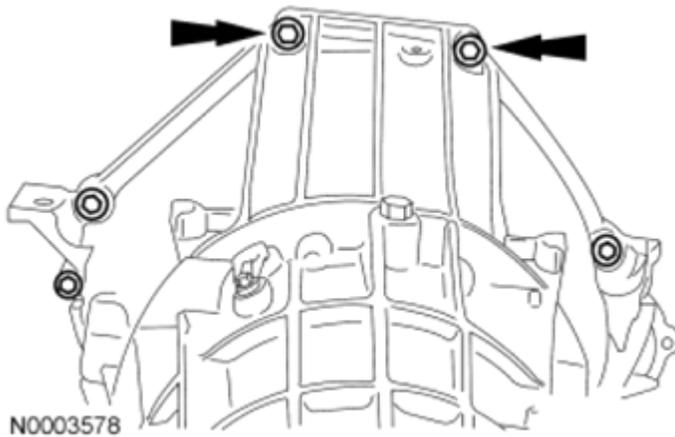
Locating Upper Transmission-To-Engine Bolts
